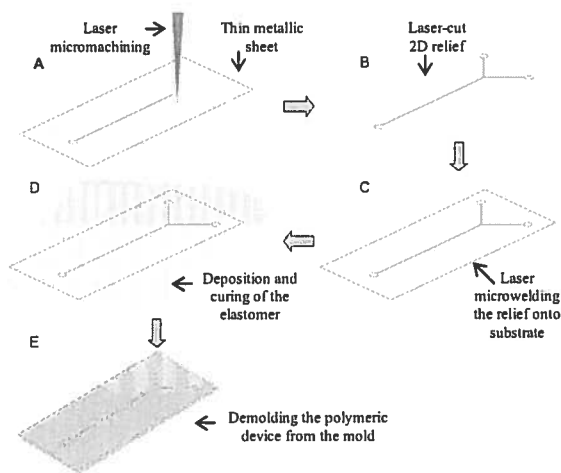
Micro-mold fabrication for a microfluidic device: (A) Laser micro machining, (B) Cleaning, (C) Laser microwelding, (D) Elastomer deposition and curing, (E) Demolding (peeling off) the part from the mold.
